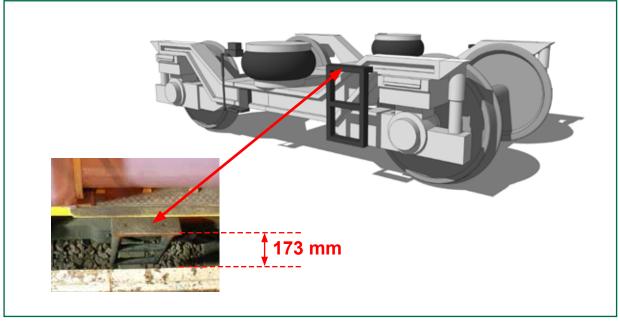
Class 315 bogie from driving cab vehicle. The inset photograph shows the tread plate fixed to the top of the cab access steps and the 173 mm gap that existed between the edges of the cab access step tread plate and the platform edge.
